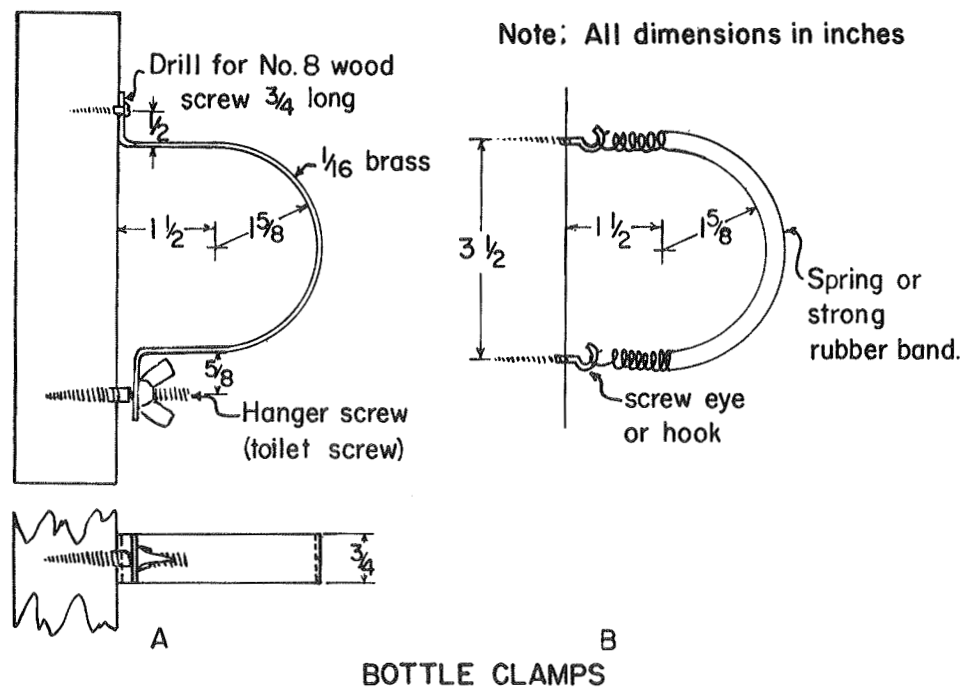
AUXILIARY EQUIPMENT FOR SINGLE-STAGE SAMPLERS
